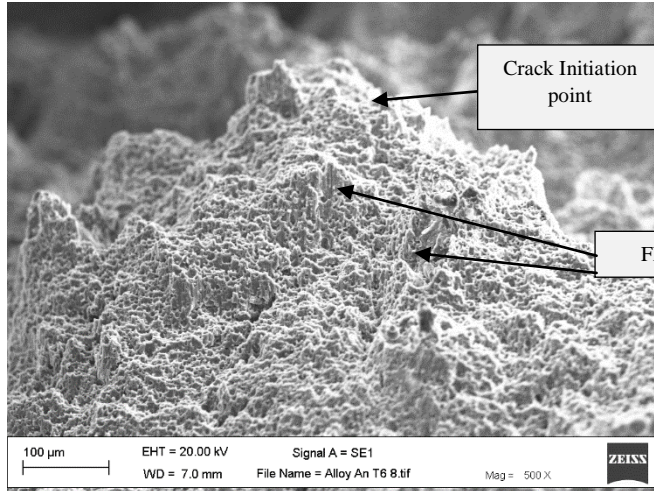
Fracture surface of Al-SR T6 specimen
